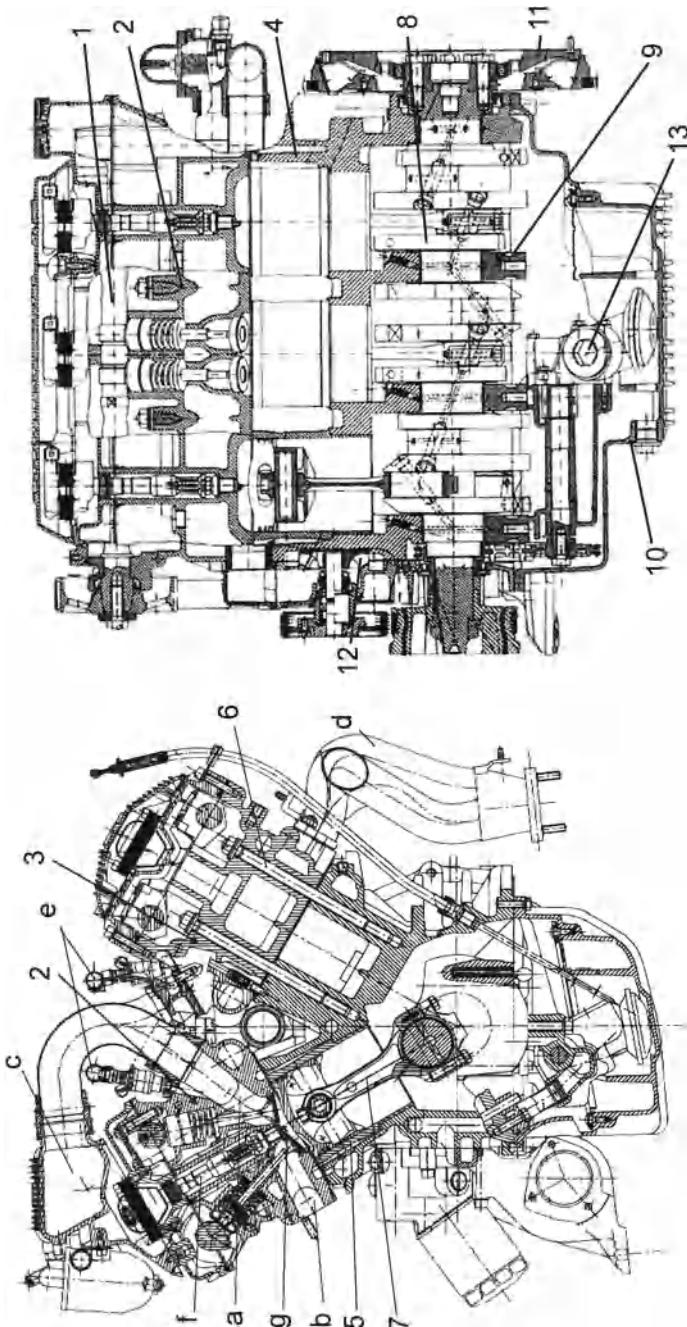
Cross section of an Alfa Romeo six-cylinders engine, V-configuration (courtesy of FIAT)
